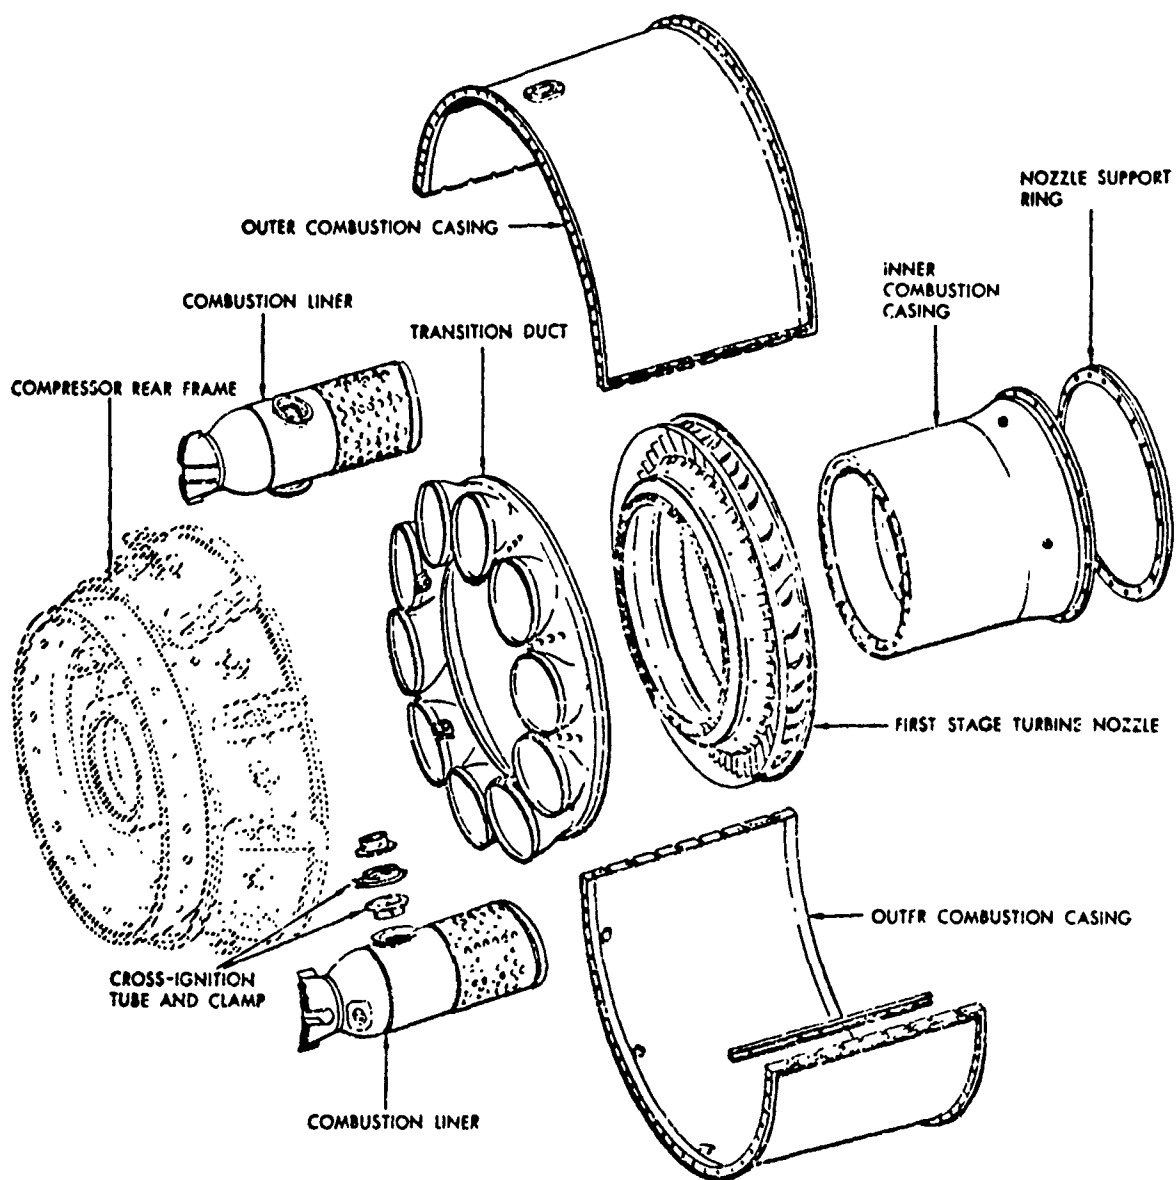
J79 Engine Combustion System, Exploded Pictorial View.
